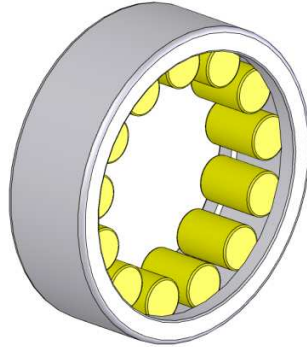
SKF Cylindrical Roller Bearings Selected for PE Gear (cage that retains rollers not shown)
